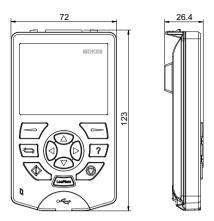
Mounting dimensions of the MDKE9 external operating panel (unit: mm)
